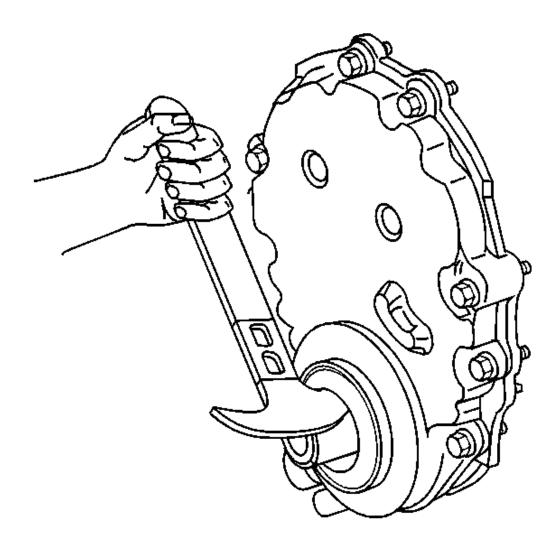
View Of Front Crankshaft Oil Seal Courtesy of GENERAL MOTORS CORP.
